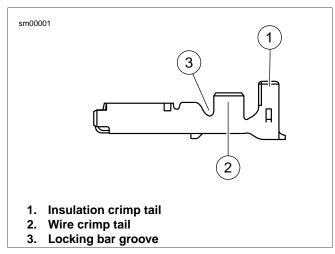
Tyco 070 Multilock Unsealed Connector: Socket Terminal
